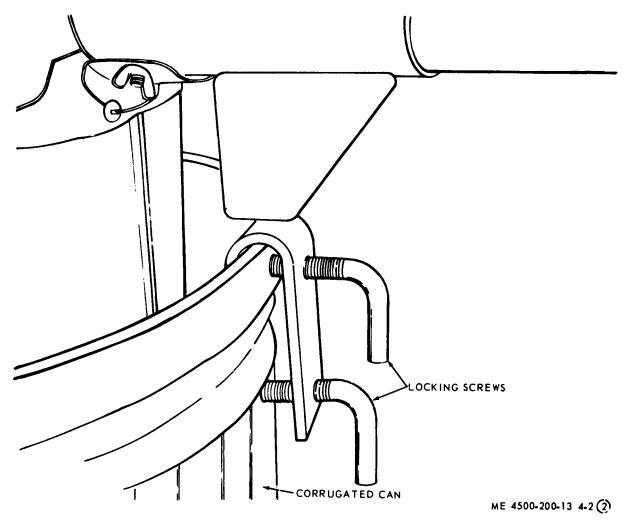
Immersion heater installation (heater locking screws) (sheet 2 of 3).
